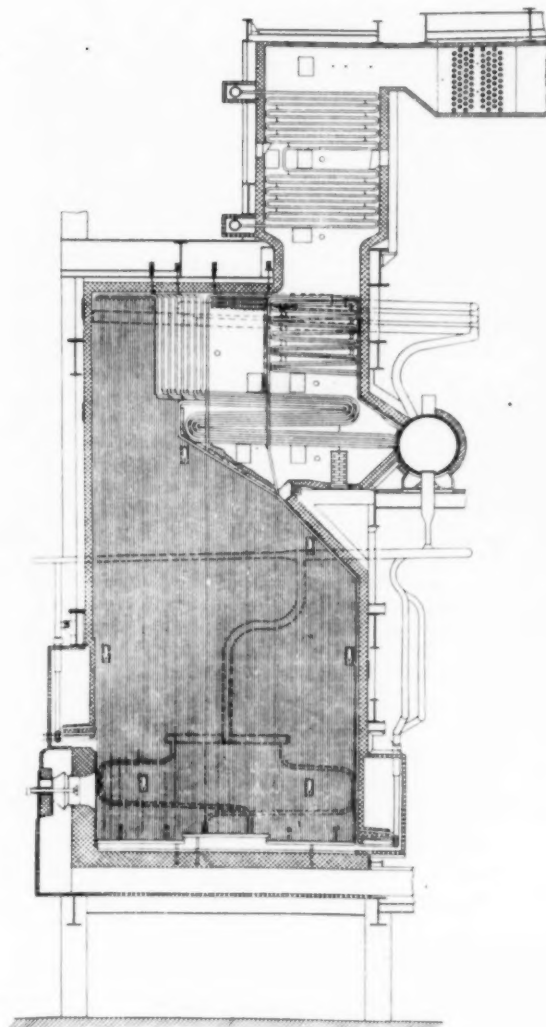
CROSS SECTION OF 15,000-KW MERCURY BOILER
